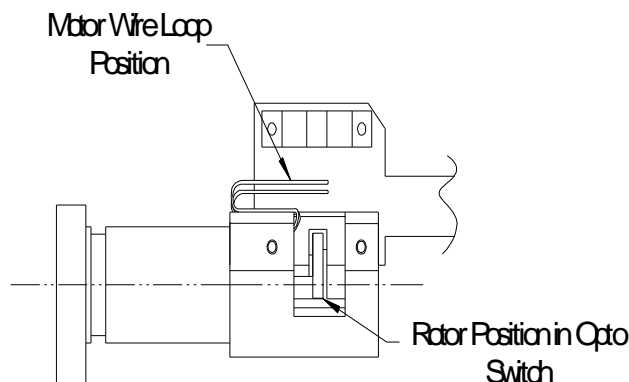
Routing of motor wires between opto mount and flexible circuit.
